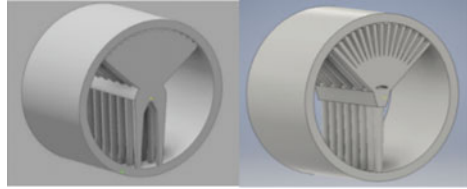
Fabricated support structure design 1 (left) and design 2 (right) for horizontally oriented cylinder
